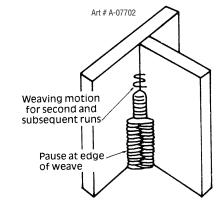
Multi Run Vertical Fillet Weld
